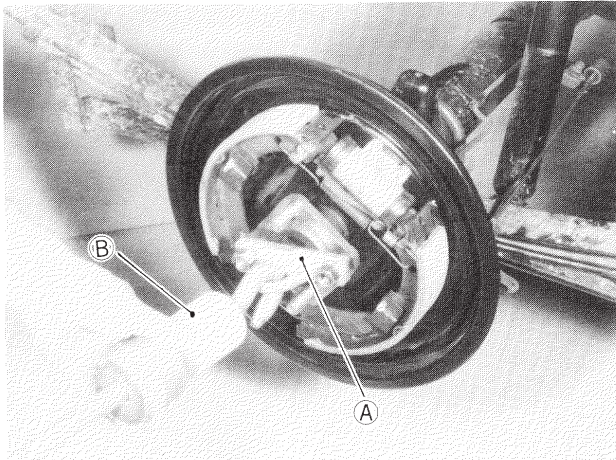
(A) Special Tool (Rear Axle Remover 09922-66010)
